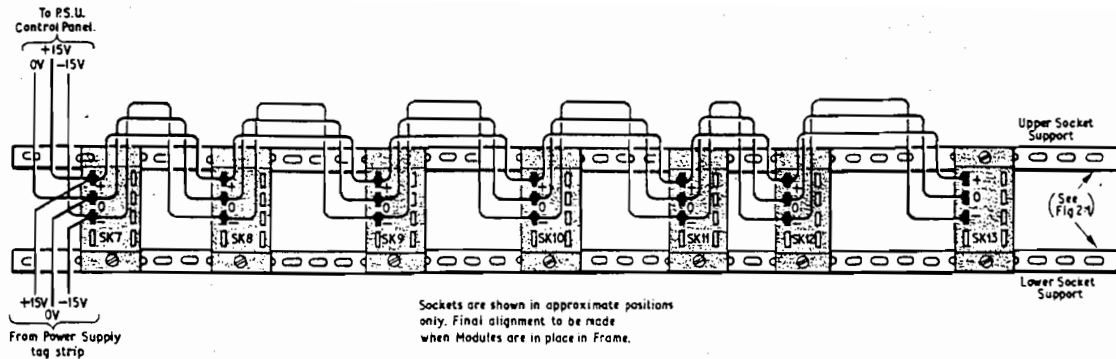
Socket arrangement and wiring on connector mounting rails
